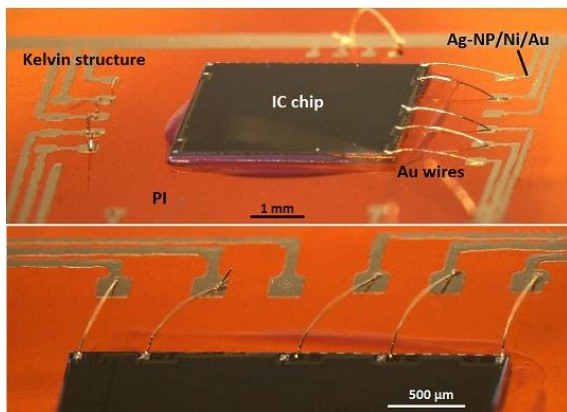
Dummy flexible package with wire-bonds from an IC chip to plated lead frame (front right and bottom) and between plated pads (front left).
